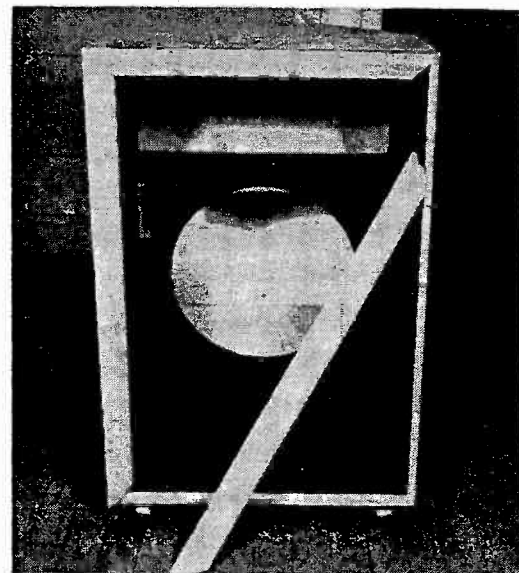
Frame molding goes on in four separate pieces, but has the appearance of a single unit. Frame is removable.
